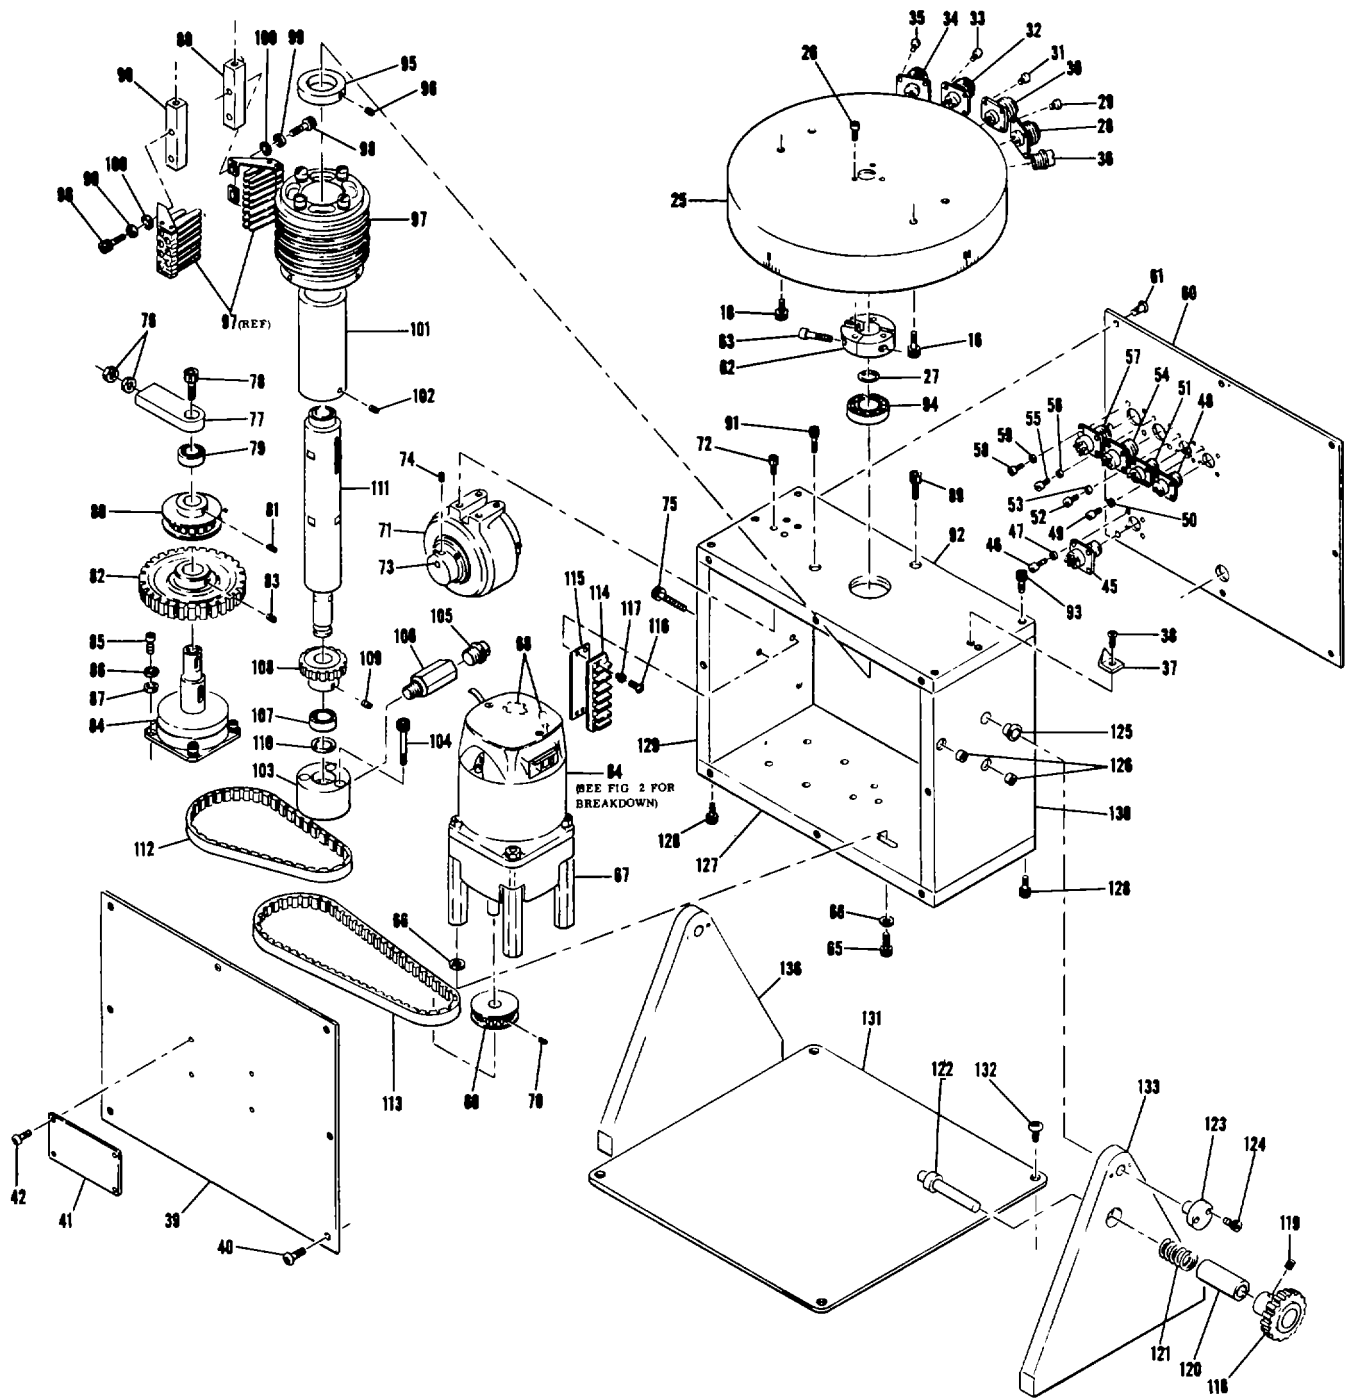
Gyro Tester, Indicator Assembly (Sheet 2 of 3)
